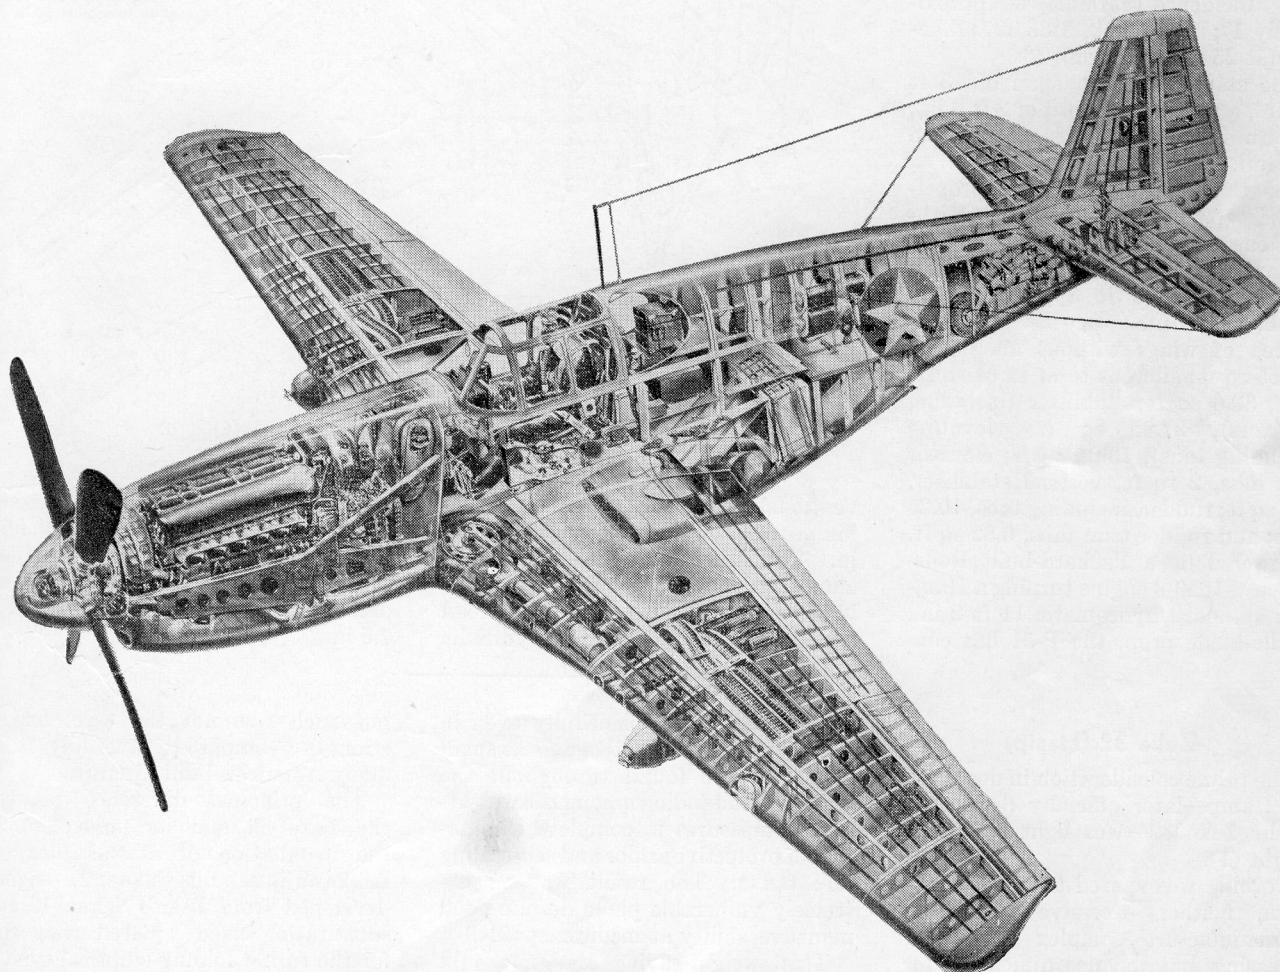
Cutaway drawing of the North American P-51 Mustang.
